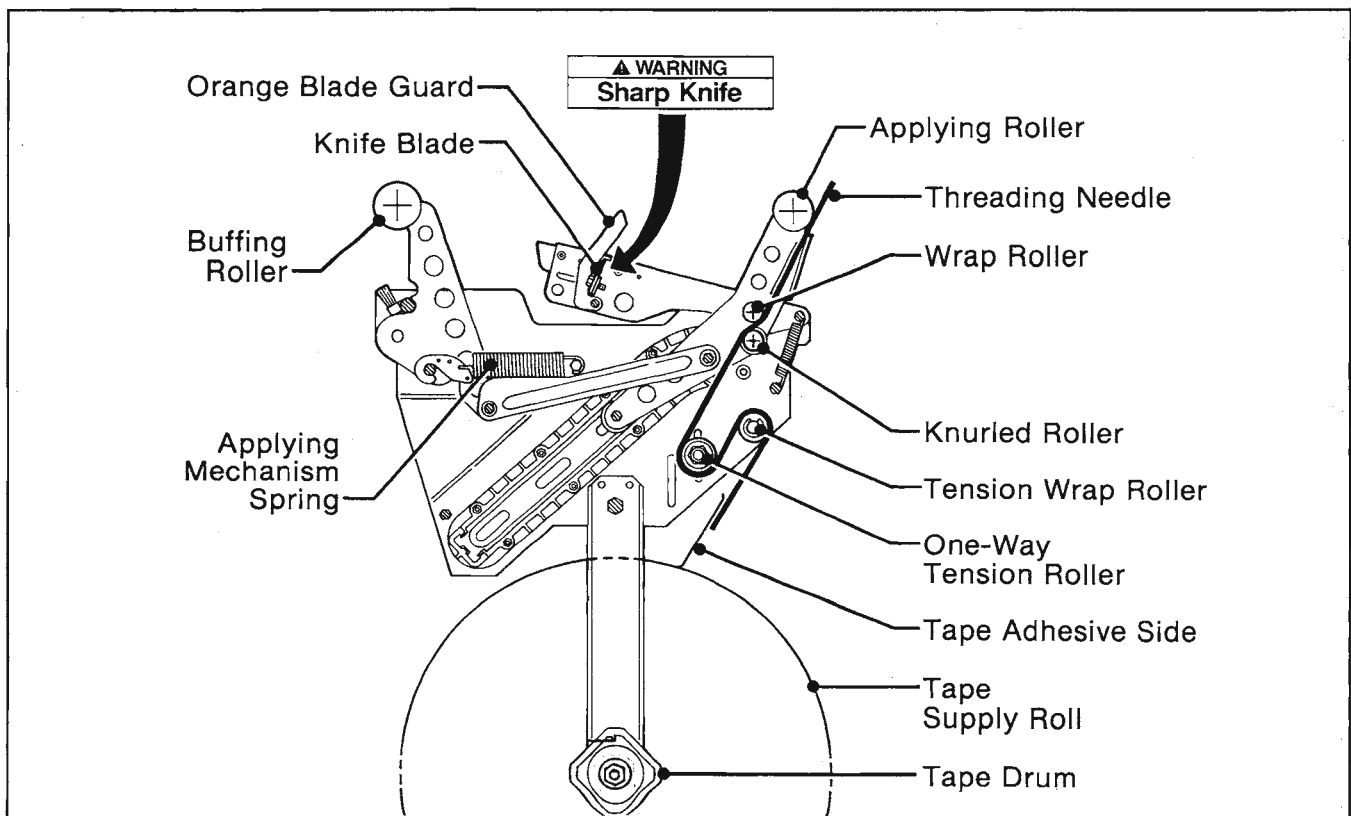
Taping Head Components/Threading Diagram – Lower Head (Left Side View)
